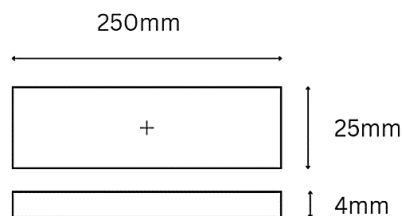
Specimen prototype for tensile test based on ASTM D5766
